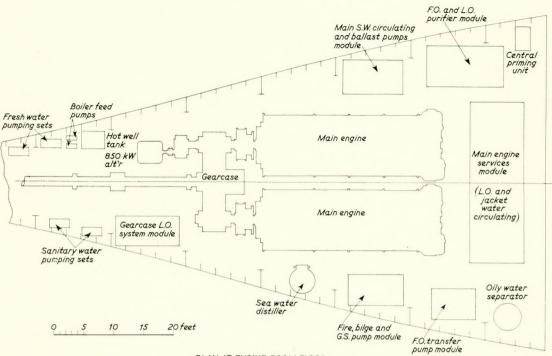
Machinery arrangement for 22 000 ton G.P. tanker
